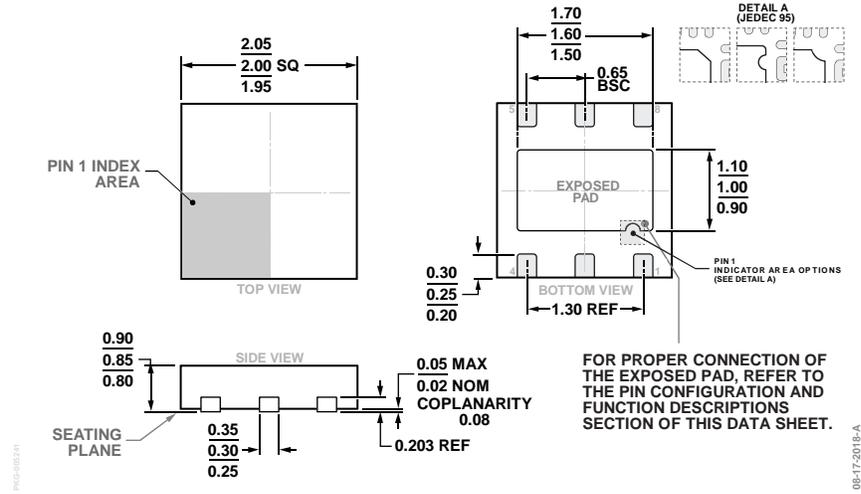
6-Lead Lead Frame Chip Scale Package [LFCSP]
